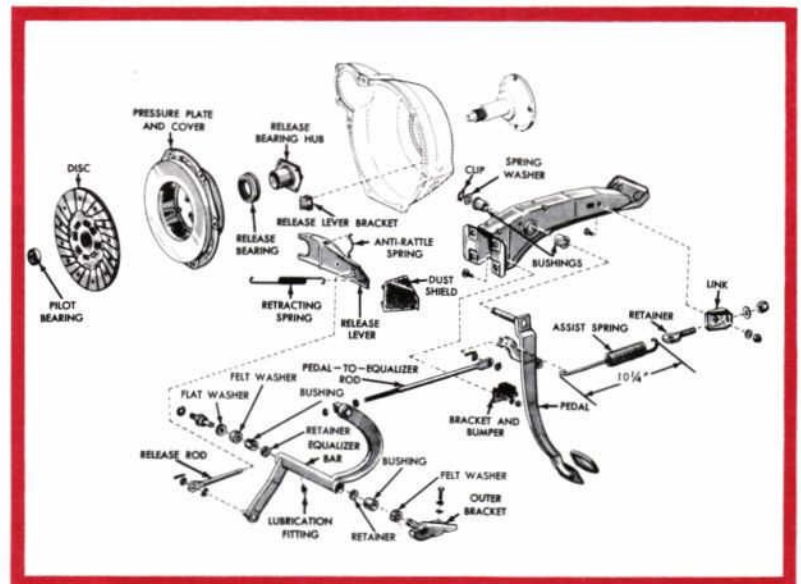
Falcon Clutch And Linkage Assembly Parts Identification
